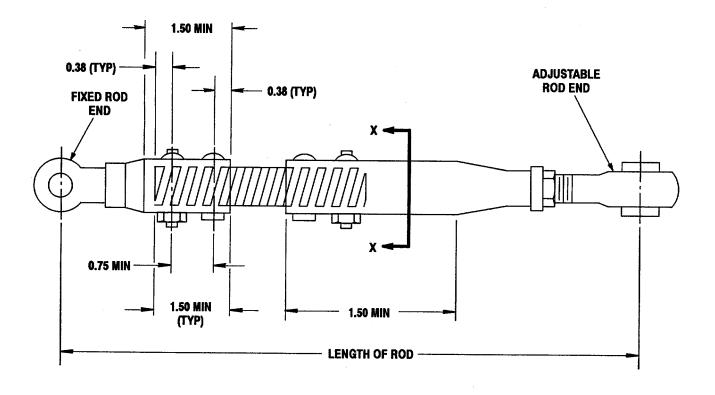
Control Rod with Bearing and Clevis Assemblies (Sheet 1 of 2)
